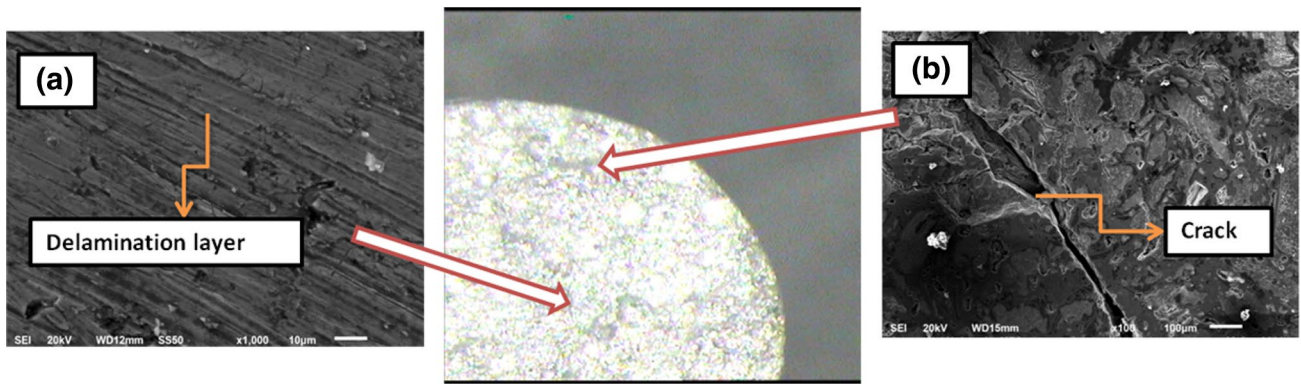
Typical SEM images of macroscopic and microscopic fatigue fracture surfaces of the un-notched specimen of Al A356 alloy
